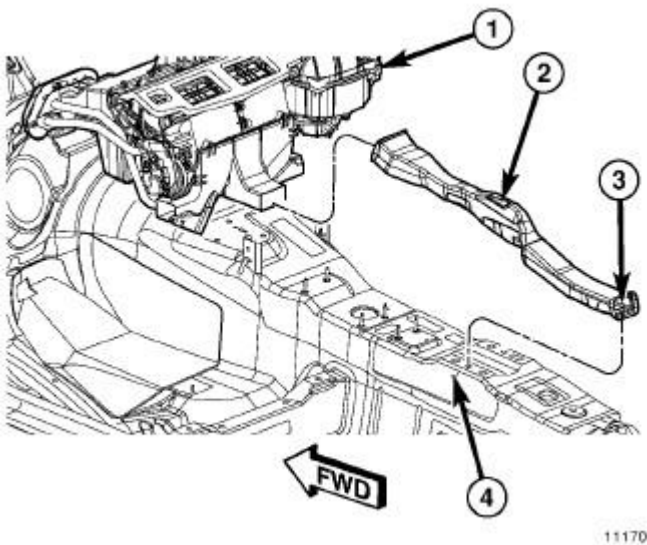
Identifying Floor Distribution Duct, Floor Console Duct, Retainer & Center Floor Panel
